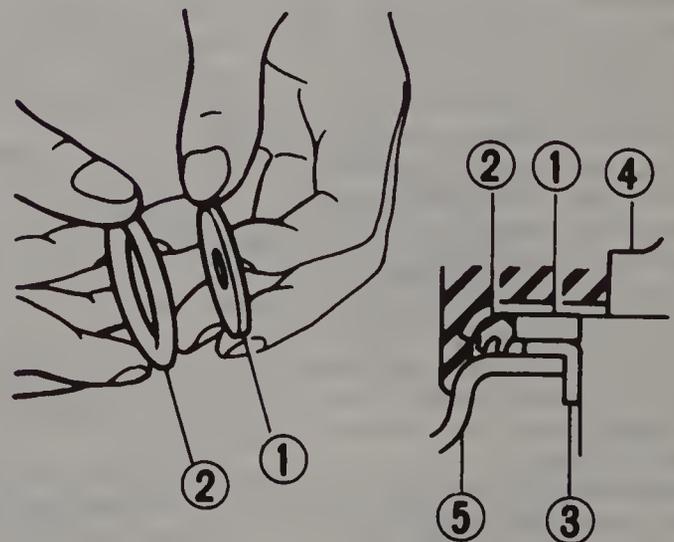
Correct installation of the strut oil seal and thrust washer (Sec 3)
